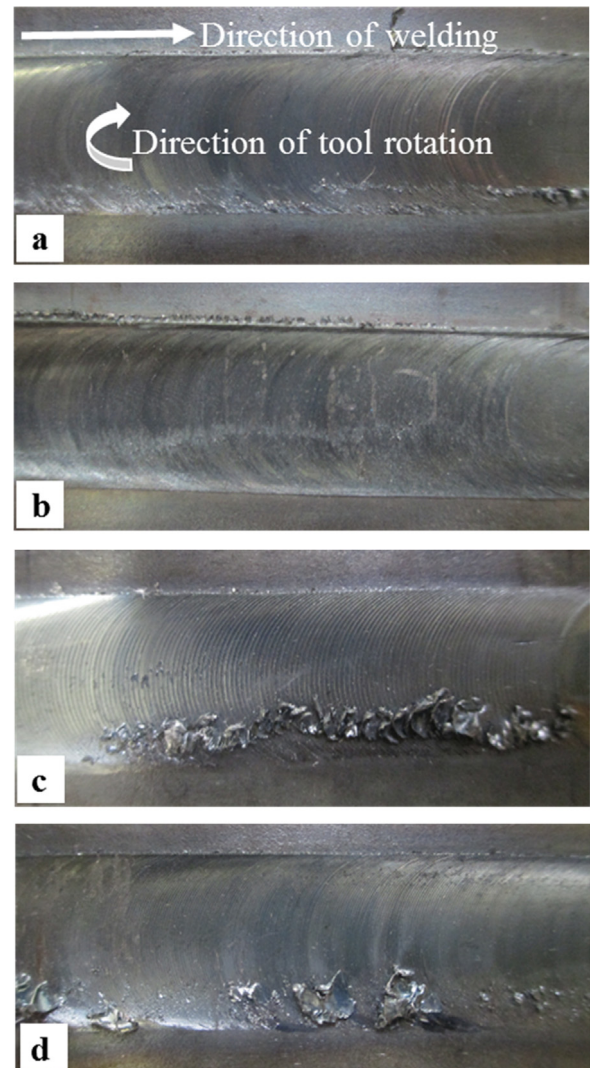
Image of the weld bead a) Sample-1 b) Sample-2 c) Sample-3 d) Sample-4.
